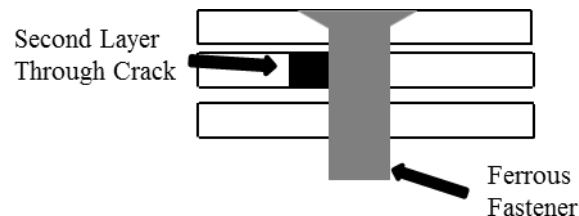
Side view of Single Fastener Test Piece with three plates and centrally located ferrous fastener.
